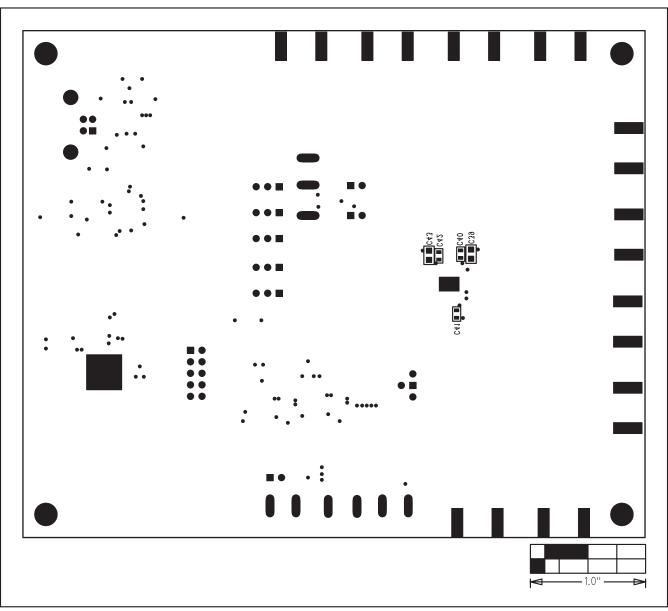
MAX9132 EV Kit Component Placement Guide—Component Side
